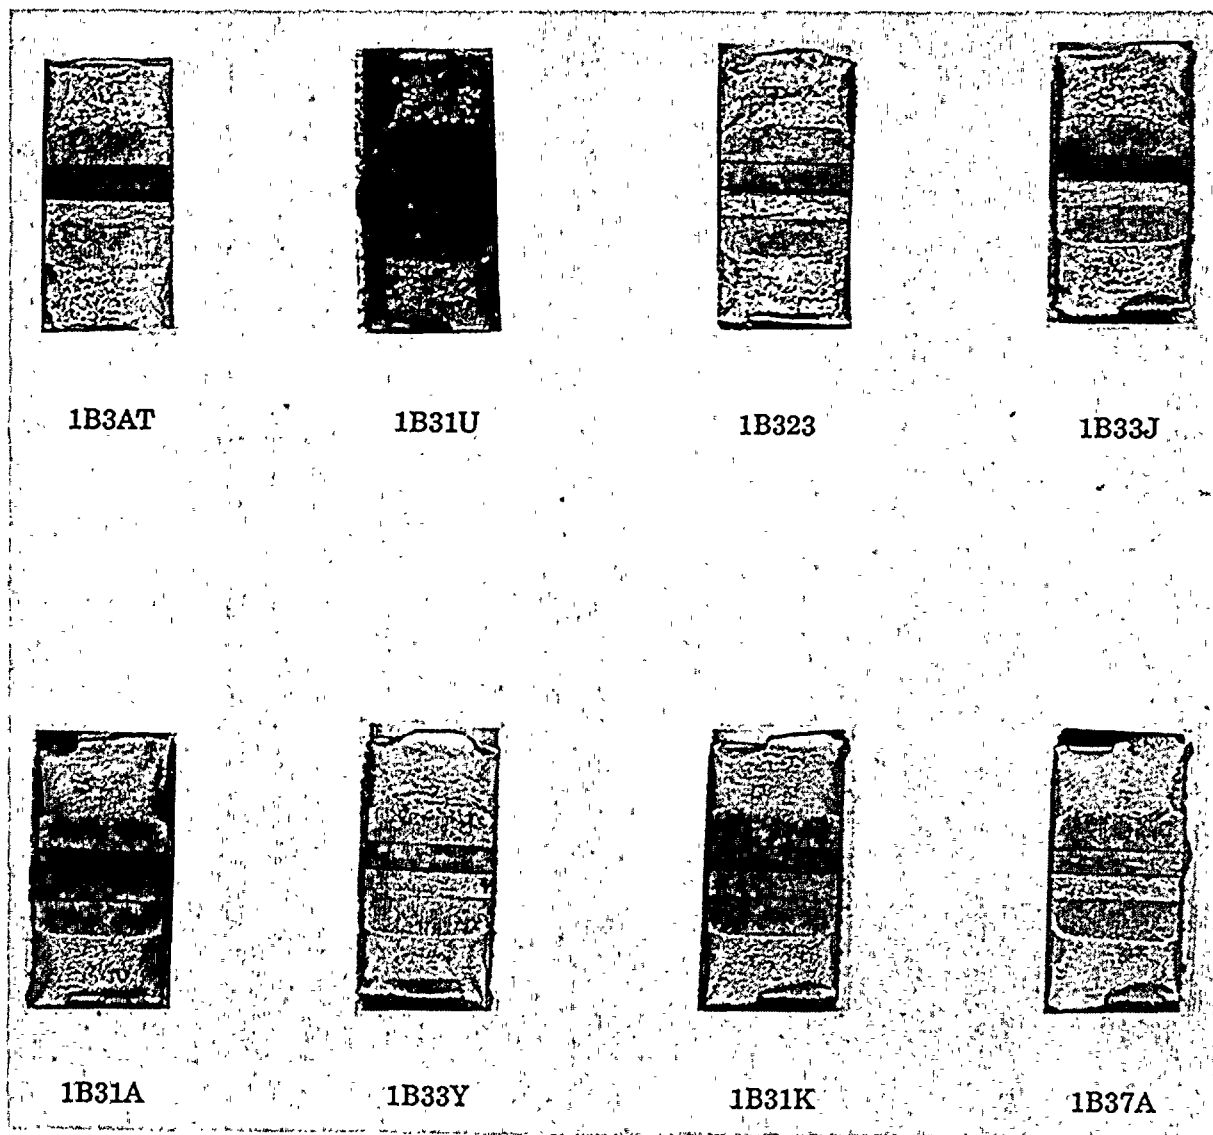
Precracked Charpy Impact Specimen Fracture Surfaces for Palo Verde Unit
